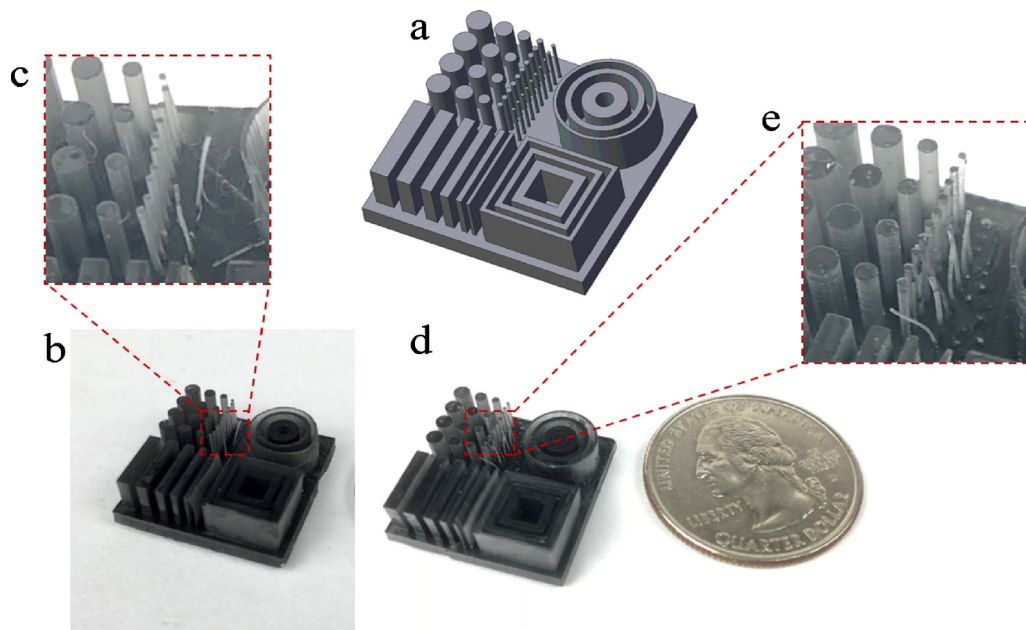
(a) the designed CAD model for test; (b) part printed by the vibration-assisted printing process; (c) a close view of the small features in part (b); (d) part printed by the normal printing process; (e) a close view of the small features in part (d).
